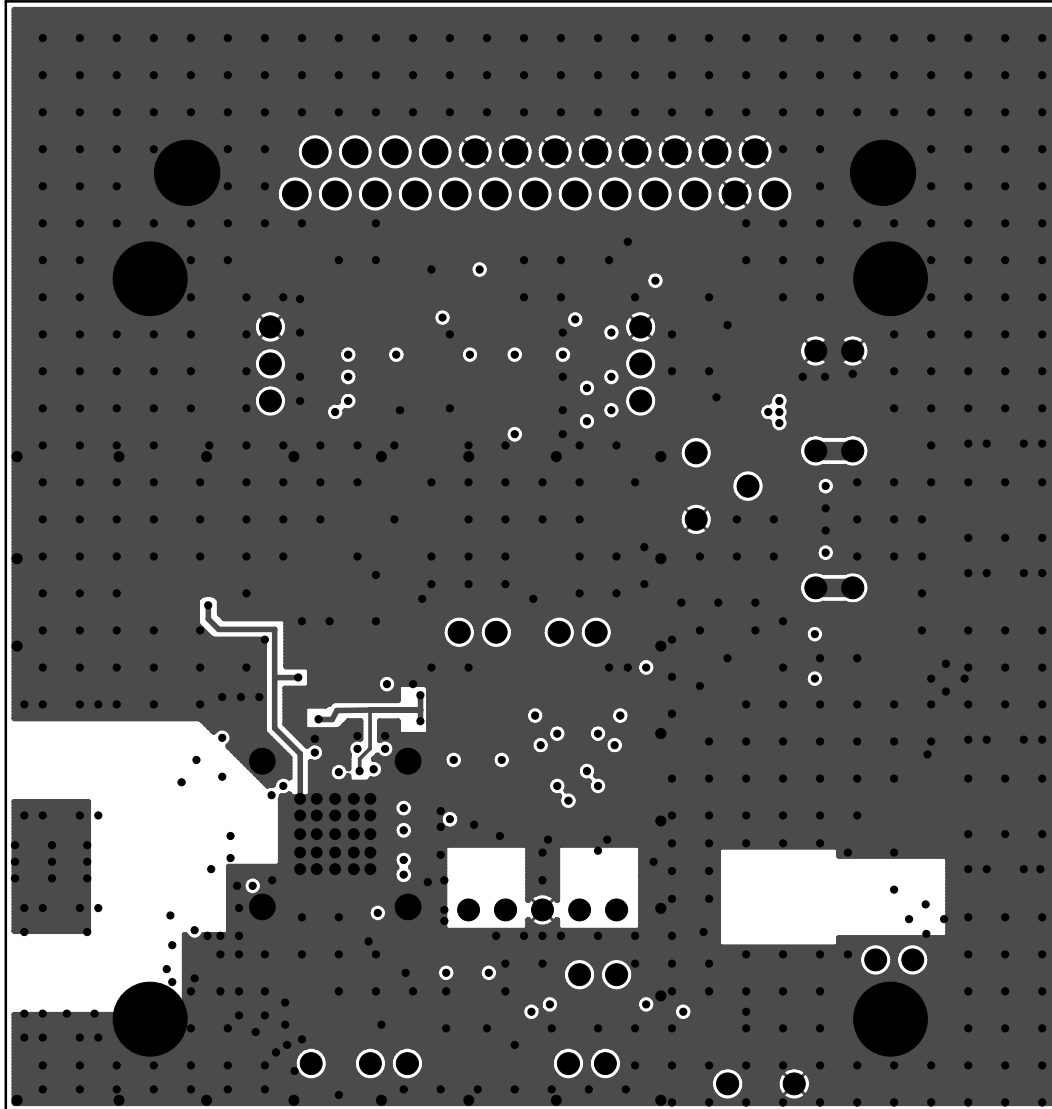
MAX3540 EV Kit PCB Layout—Inner Layer 2
